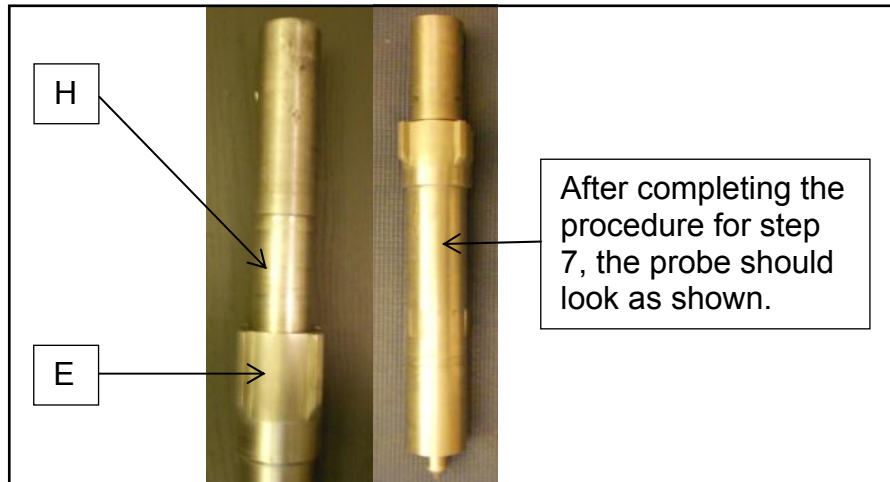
Probe assembly step 7 showing Part H connected to Part E
